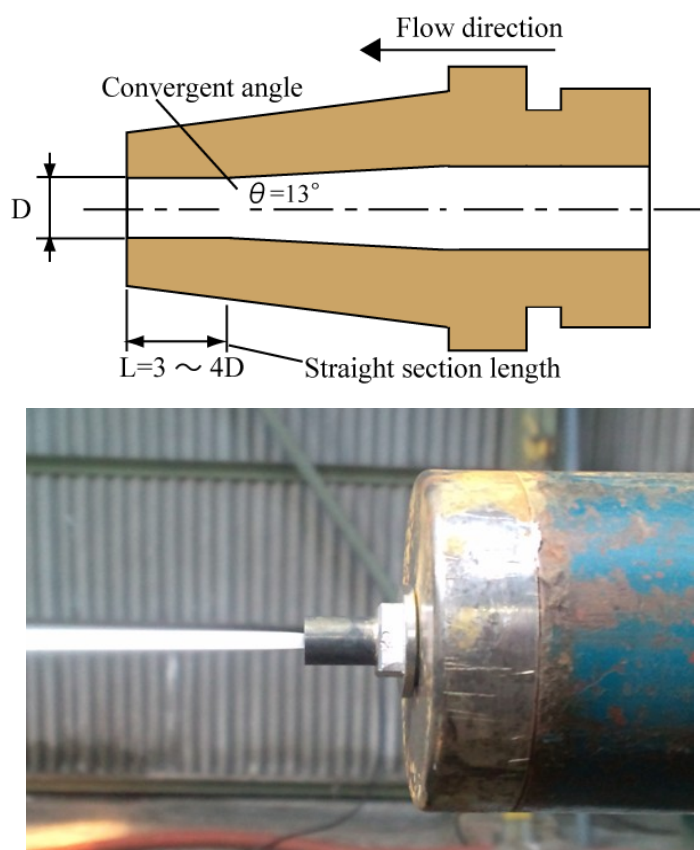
Schematic drawing and photograph of Straight type nozzle
